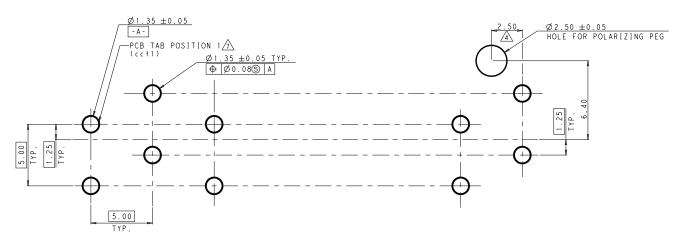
Recommend Pcb Layout - Component Side Pcb 1.5±0.2 Thick
